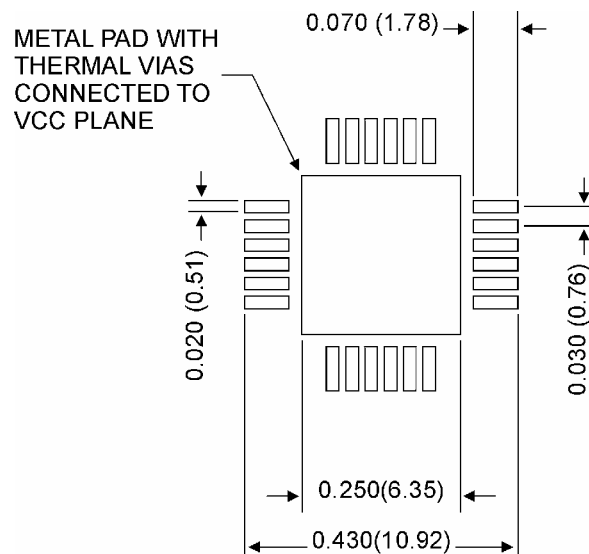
RDA012LP-QP footprint, dimensions shown in inches (mm).
